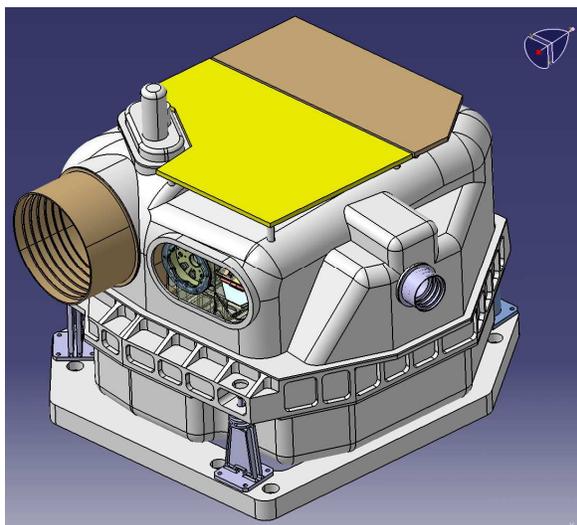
Courtesy SELEX Galileo : HYP/PAN Camera Layout
